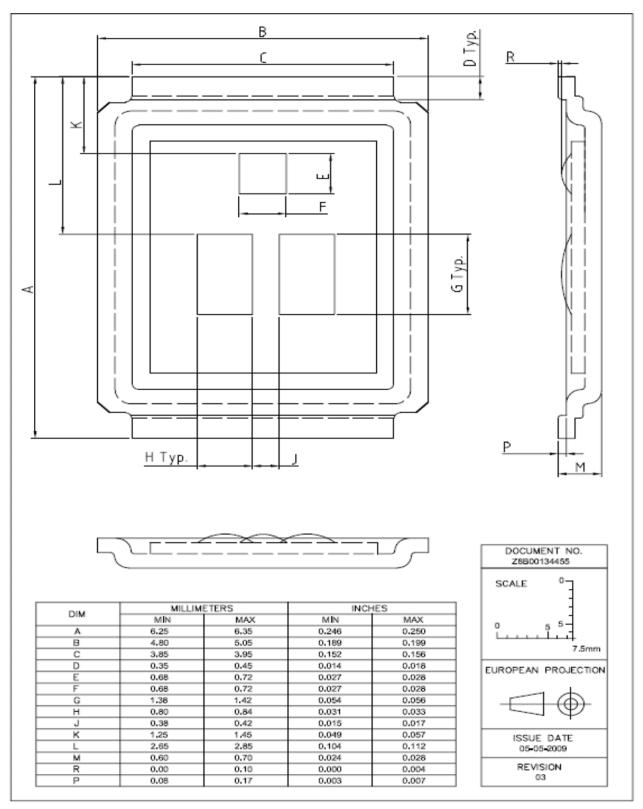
Outlines MG-WDSON-2, dimensions in mm/inches
